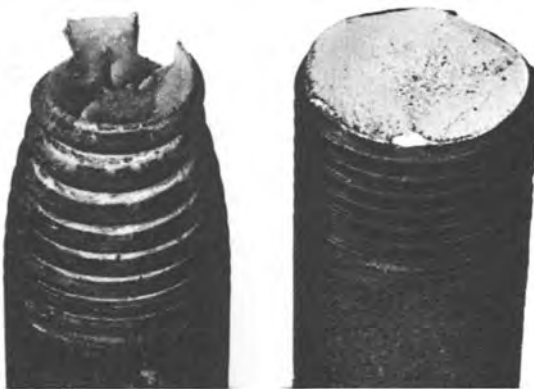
Two identical steel bolts that had been given different heat treatments, then pulled to fracture in a tensile test. The bolt at left was annealed; when pulled, it had much deformation as evidenced by the necking and thread separation. Fracture was of the cup-and-cone type with a large shear lip, similar to that in Fig. 2. The bolt at right was austenitized, then brine quenched to a high hardness. The bright, transverse fracture and lack of deformation characterize a brittle fracture.
